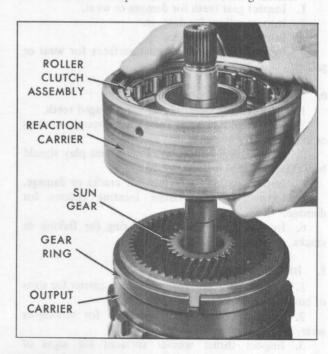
Removing Reaction Carrier and Roller Clutch
